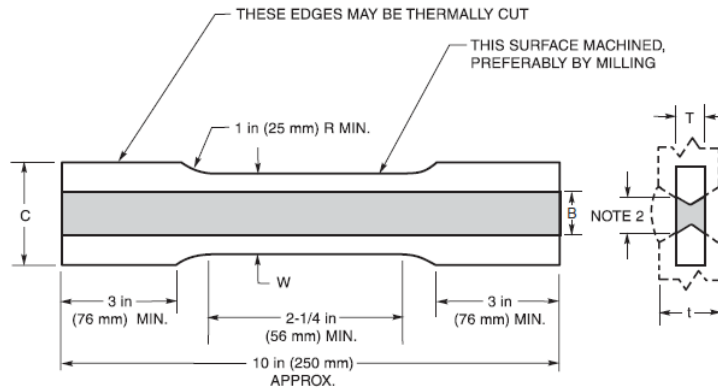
Specimens for longitudinal tension test (AWS B4.0, 2016)
